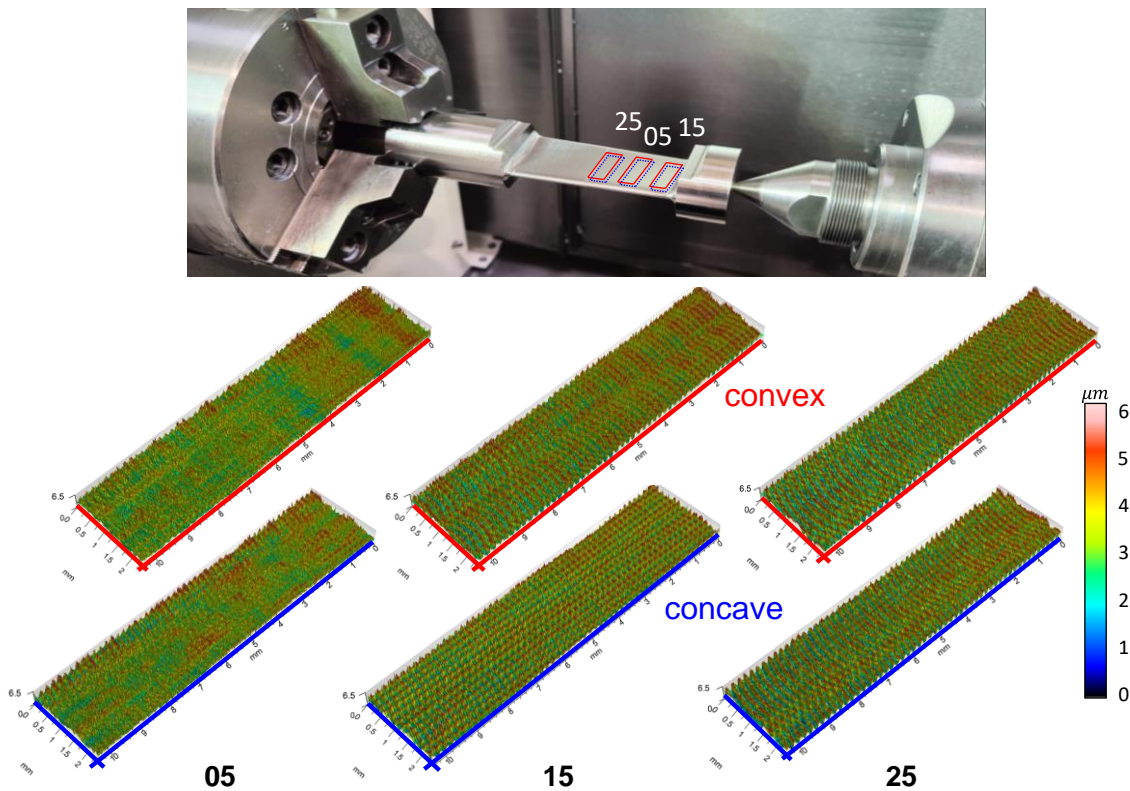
Machined blade and topography inspection of the central part.
